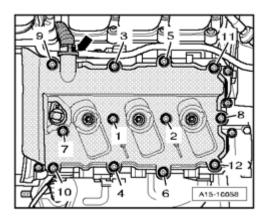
Removing Crankshaft Housing Ventilation Hose & Right Cylinder Head Cover Bolts In Sequence
